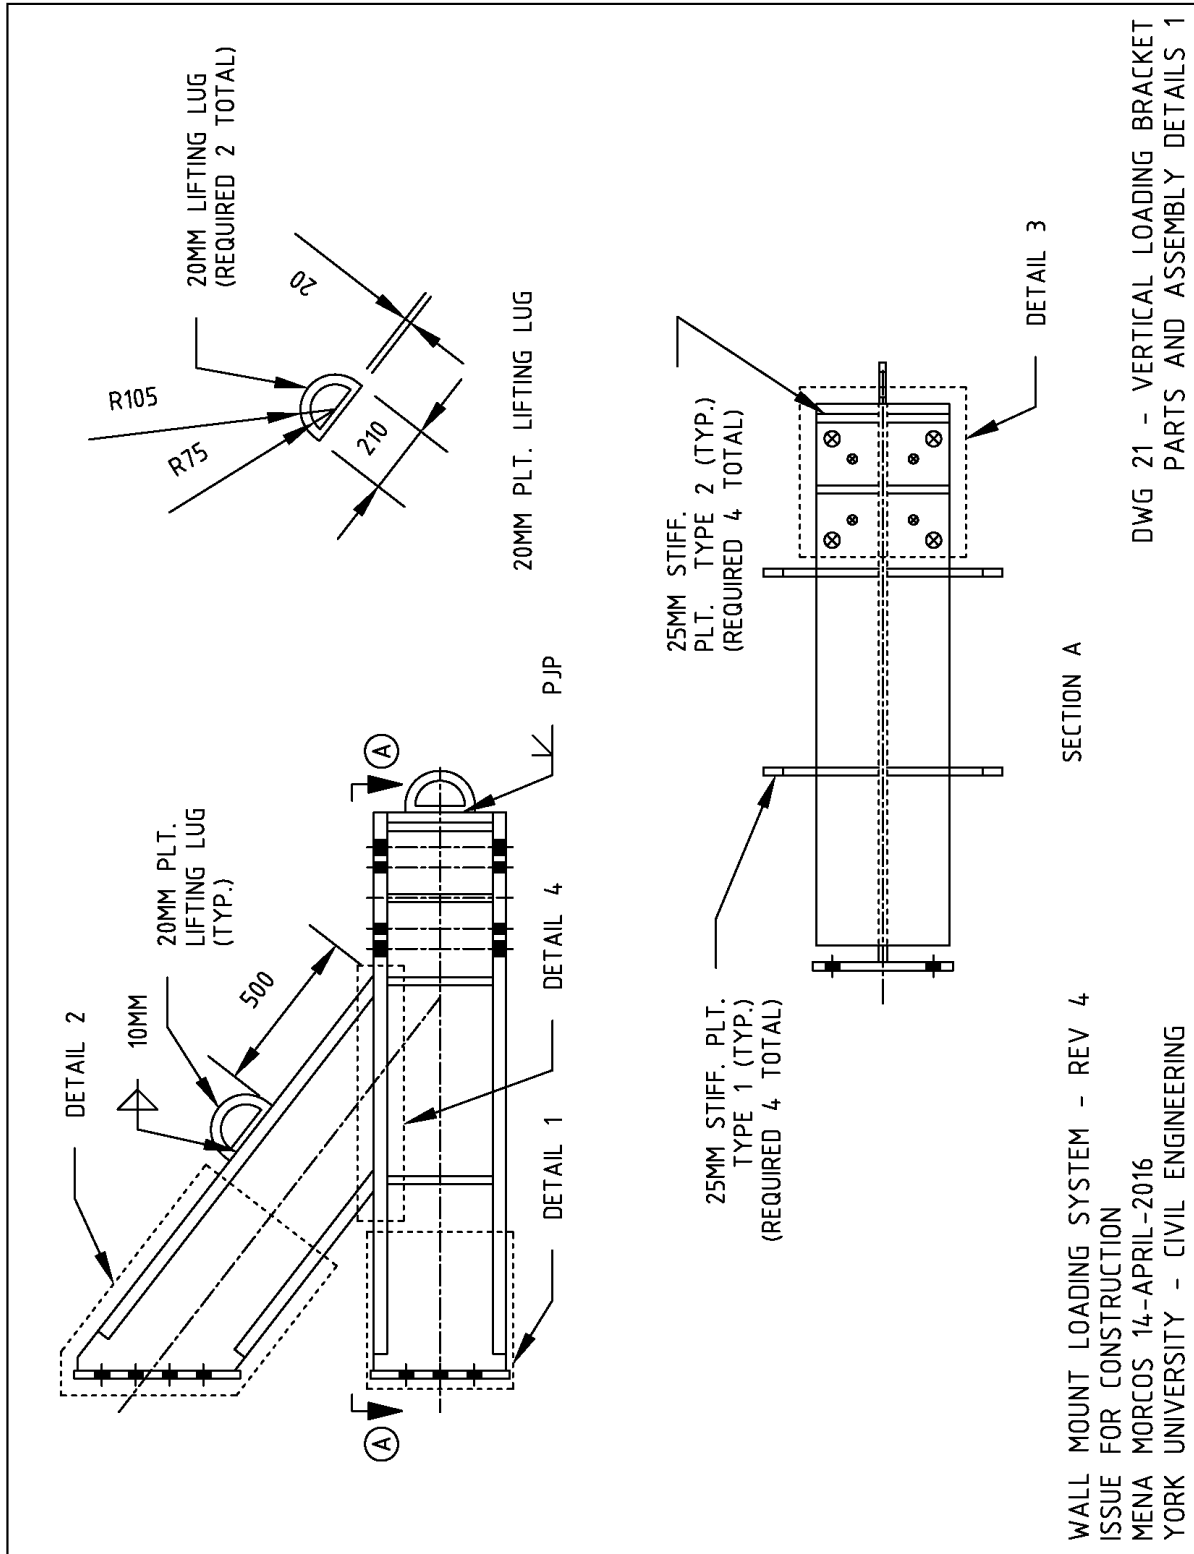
Wall mount loading system design and fabrication drawing – Drawing 21.
